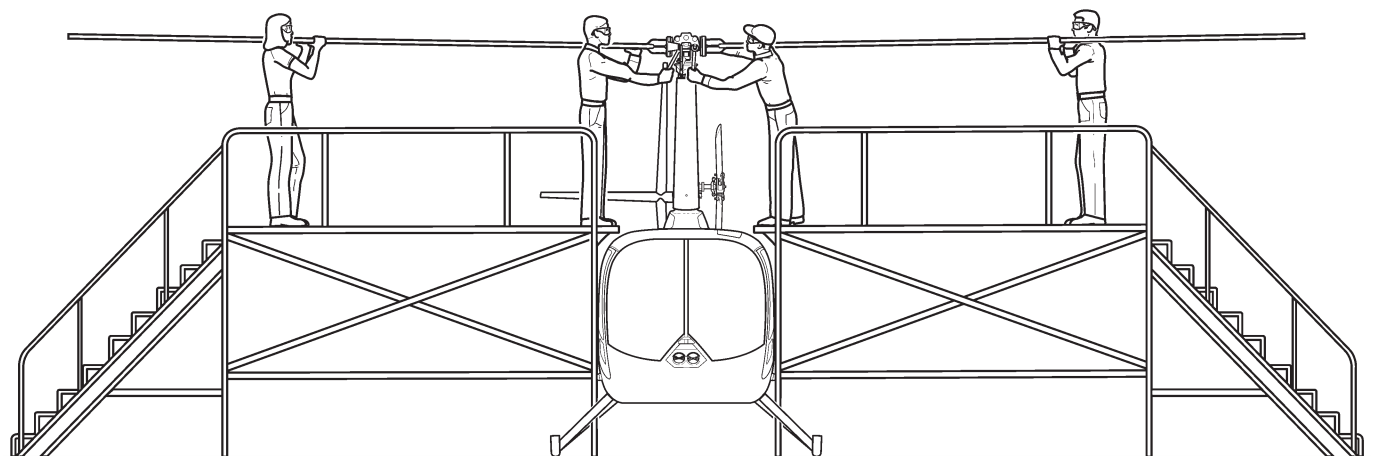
SUPPORTING MAIN ROTOR BLADES DURING BLADE REMOVAL OR INSTALLATION
